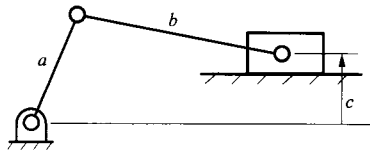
General slider-crank mechanism with offset dimension  $c$ .
